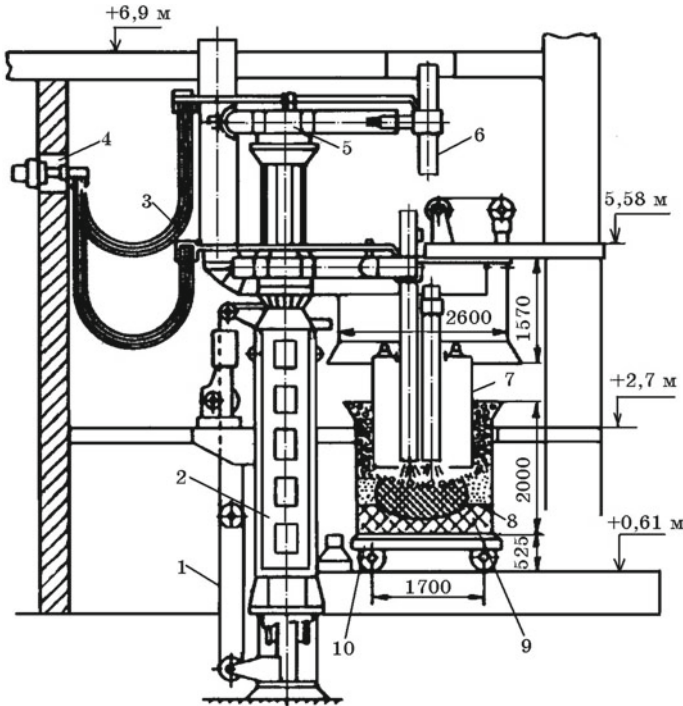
General view of the arc furnace for smelting boron carbide by a block process 1—cable; 2—rack mechanism for moving the electrode; 3—flexible cable; 4—aperture; 5—sleeve of the electrode holder; 6—electrode; 7—movable casing; 8—outer casing; 9—hearth; 10—roll-out trolley
